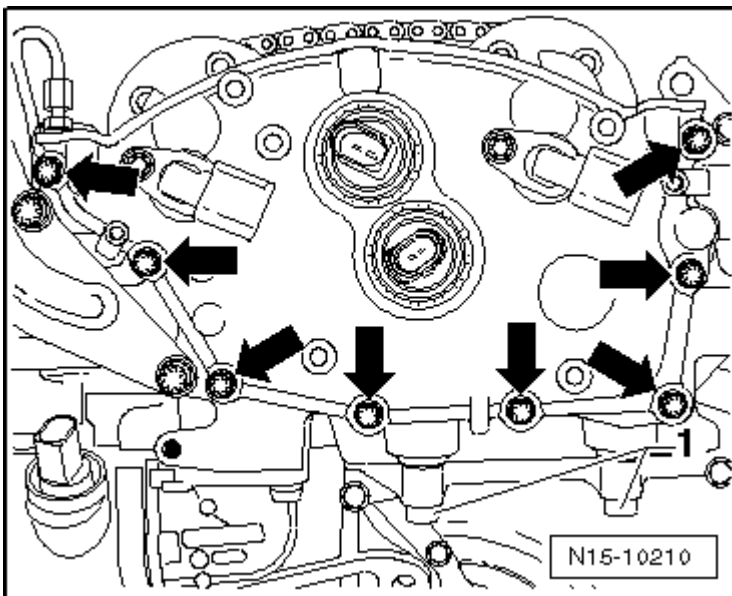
Identifying Mounting Bolts For Sealing Flange And Cover Piece
